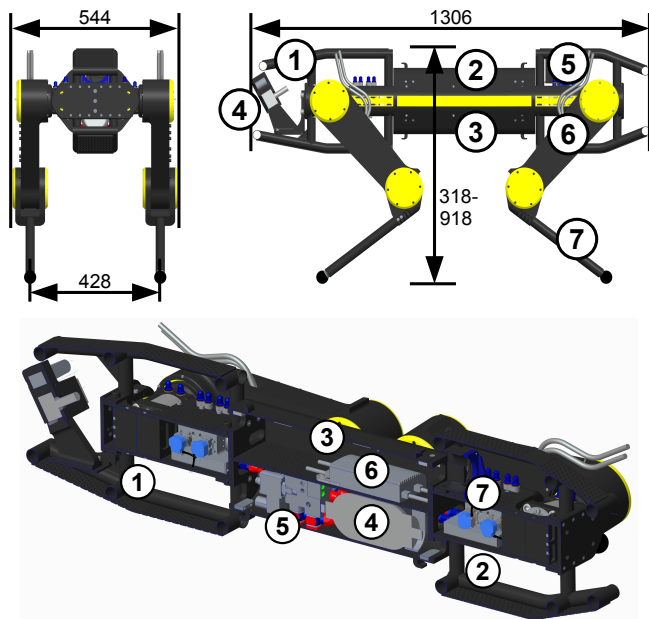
Dimensions and design details of HyQ2Max. *Top*: Frontal and lateral view of HyQ2Max CAD showing the overall dimensions (in mm) of the robot. The numbers describe the main parts and details of the robot: (1) protective cage with aluminium bars; (2) upper half of central torso section with electronics; (3) lower half of central torso section with hydraulics; (4) Perception system; (5) hydraulic hoses and electric wires from torso to upper leg; (6) upper leg shells; (7) lower leg tube and rubber foot. *Bottom*: Section view through the sagittal plane of the robot CAD model with numbered details: (1) front section of torso; (2) hind section of torso; (3) central section of torso; (4) hydraulic accumulator; (5) hydraulic manifold with pressure relief valve and vent valve for safety; (6) onboard computer for locomotion control; (7) hydraulic manifold for each leg connecting 2 valves and the HAA motor.
